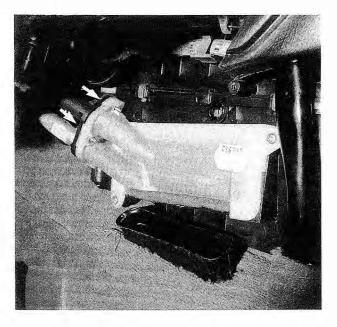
Heater core flange bolts (arrows) between heater valve and heater core.
